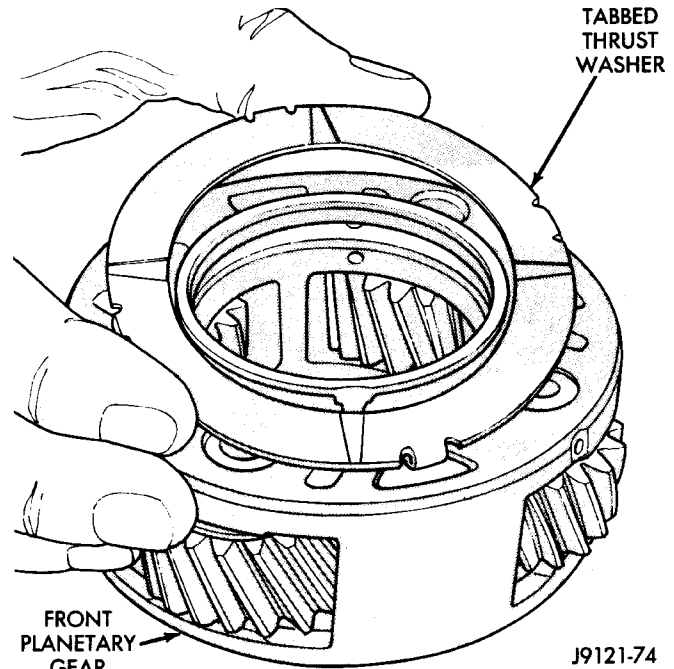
Installing Thrust Washer On Front Planetary Gear
